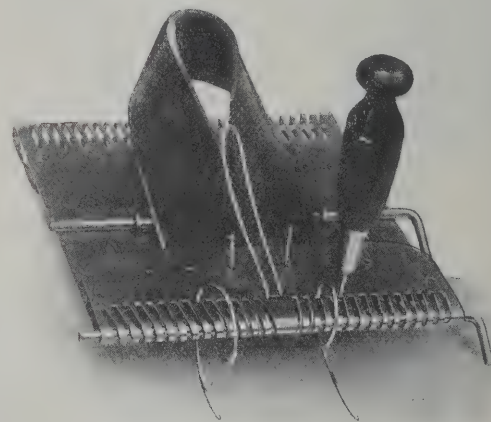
Tool for Truing, which permits Adjustment of Carbon to present Fresh Cutting Edges
